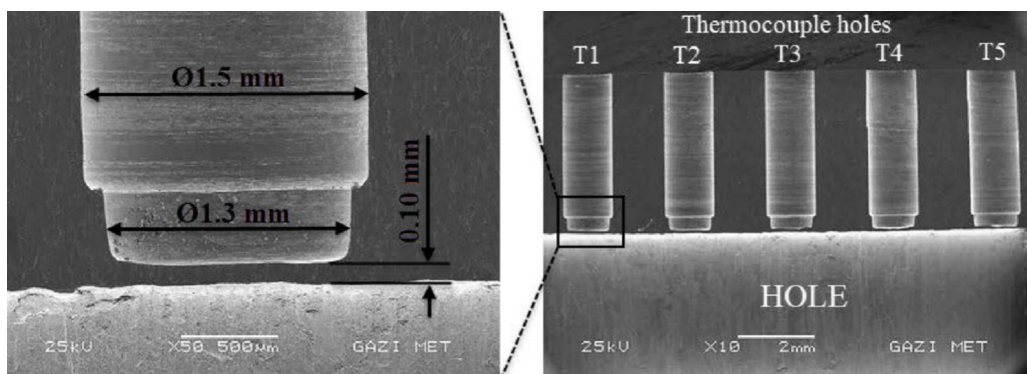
SEM images of the cross section of the workpiece showing positions and dimensions of thermocouple holes (Ucak and Cicek, 2018)
